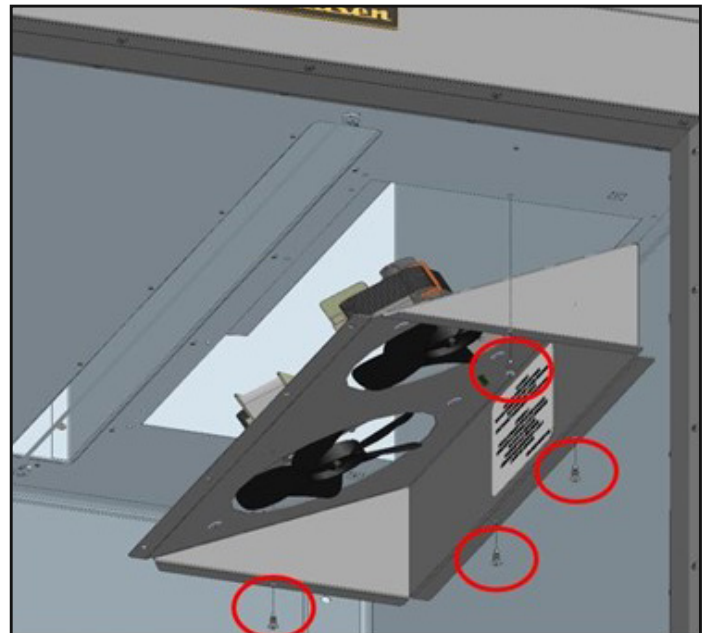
B.9.1d Evaporator Fan Assembly Removal
